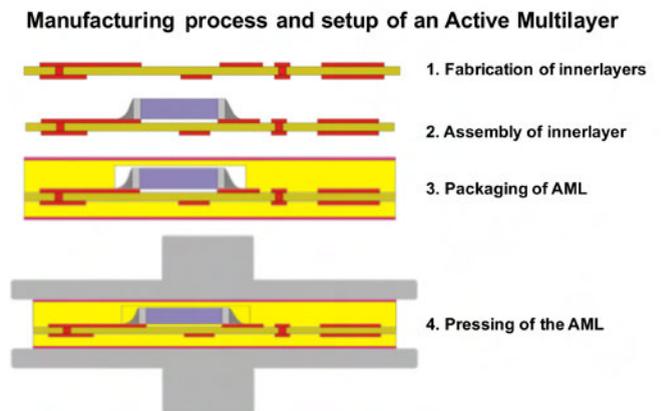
The fabrication process for embedding devices in PCBs, Part 1.
